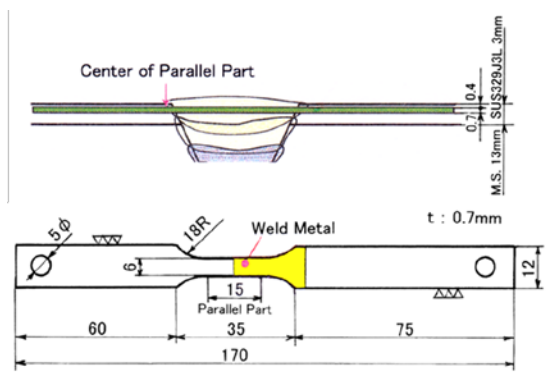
Shape and size of test specimen for stress corrosion cracking test
